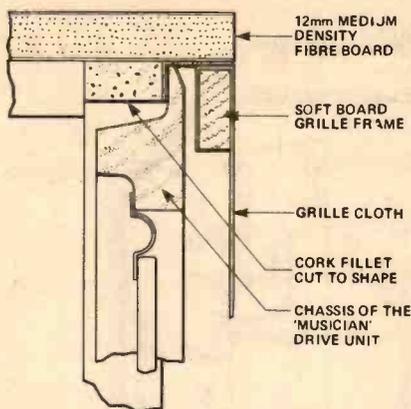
Vertical cross-section through the enclosure with the Musician drive unit in position.
